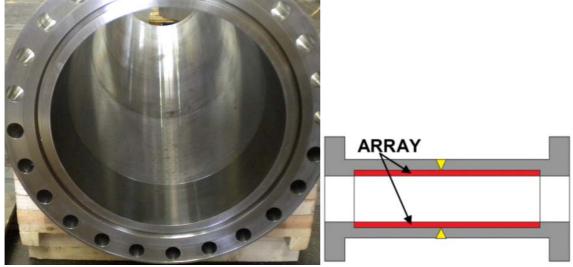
Photo of the perforations inside the array and cross sectional sketch of array in spool piece
